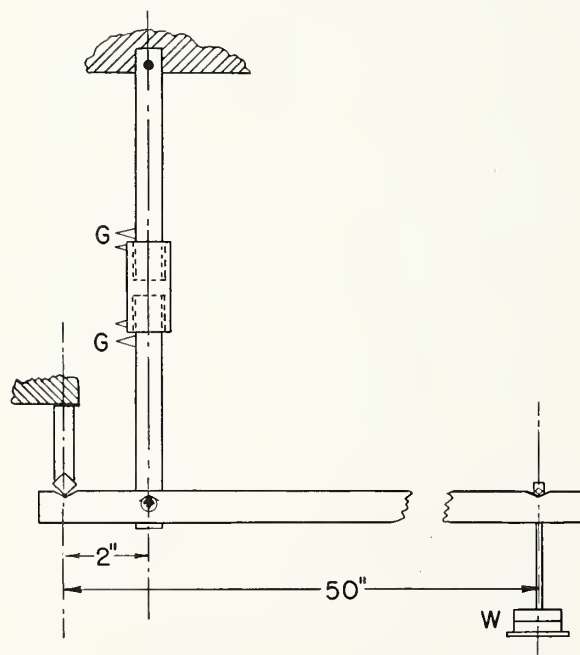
Sketch of loading device for maintaining constant tensile load on soldered joints in copper tubing.
